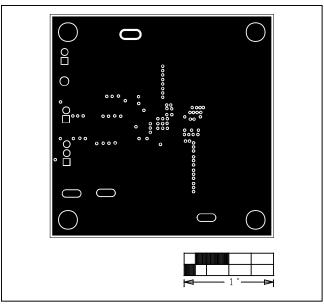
MAXM17545 EV Kit PCB Layout—PGND Layer 2
